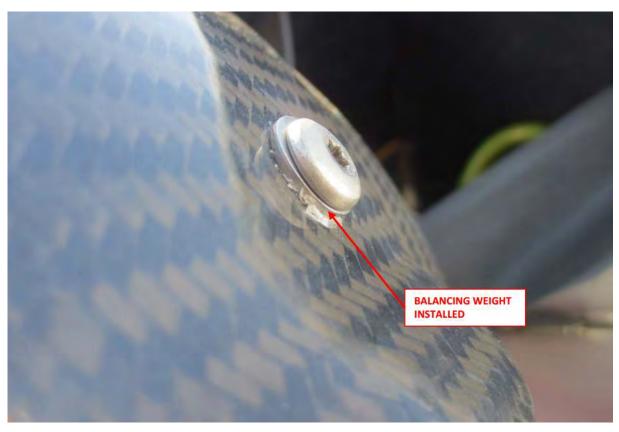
BALANCING WEIGHT (WASHER) INSTALLED ON SPINNER DOME
